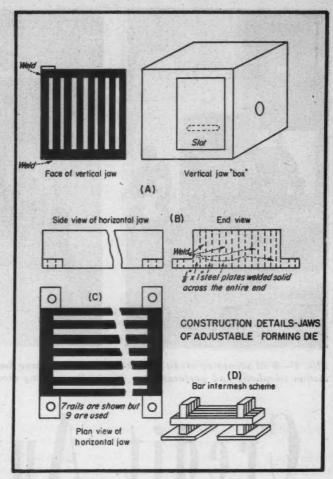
Construction details of intermeshing jaws on the forming die assembly.
